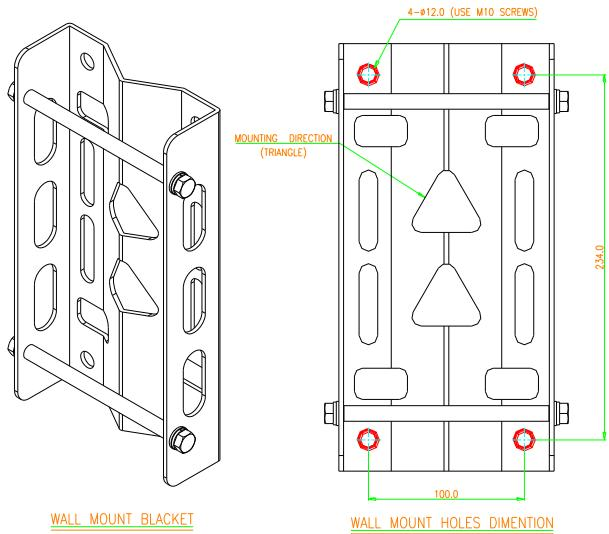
3/5/7 band RU, PS700/800 RU – wall mount bracket
